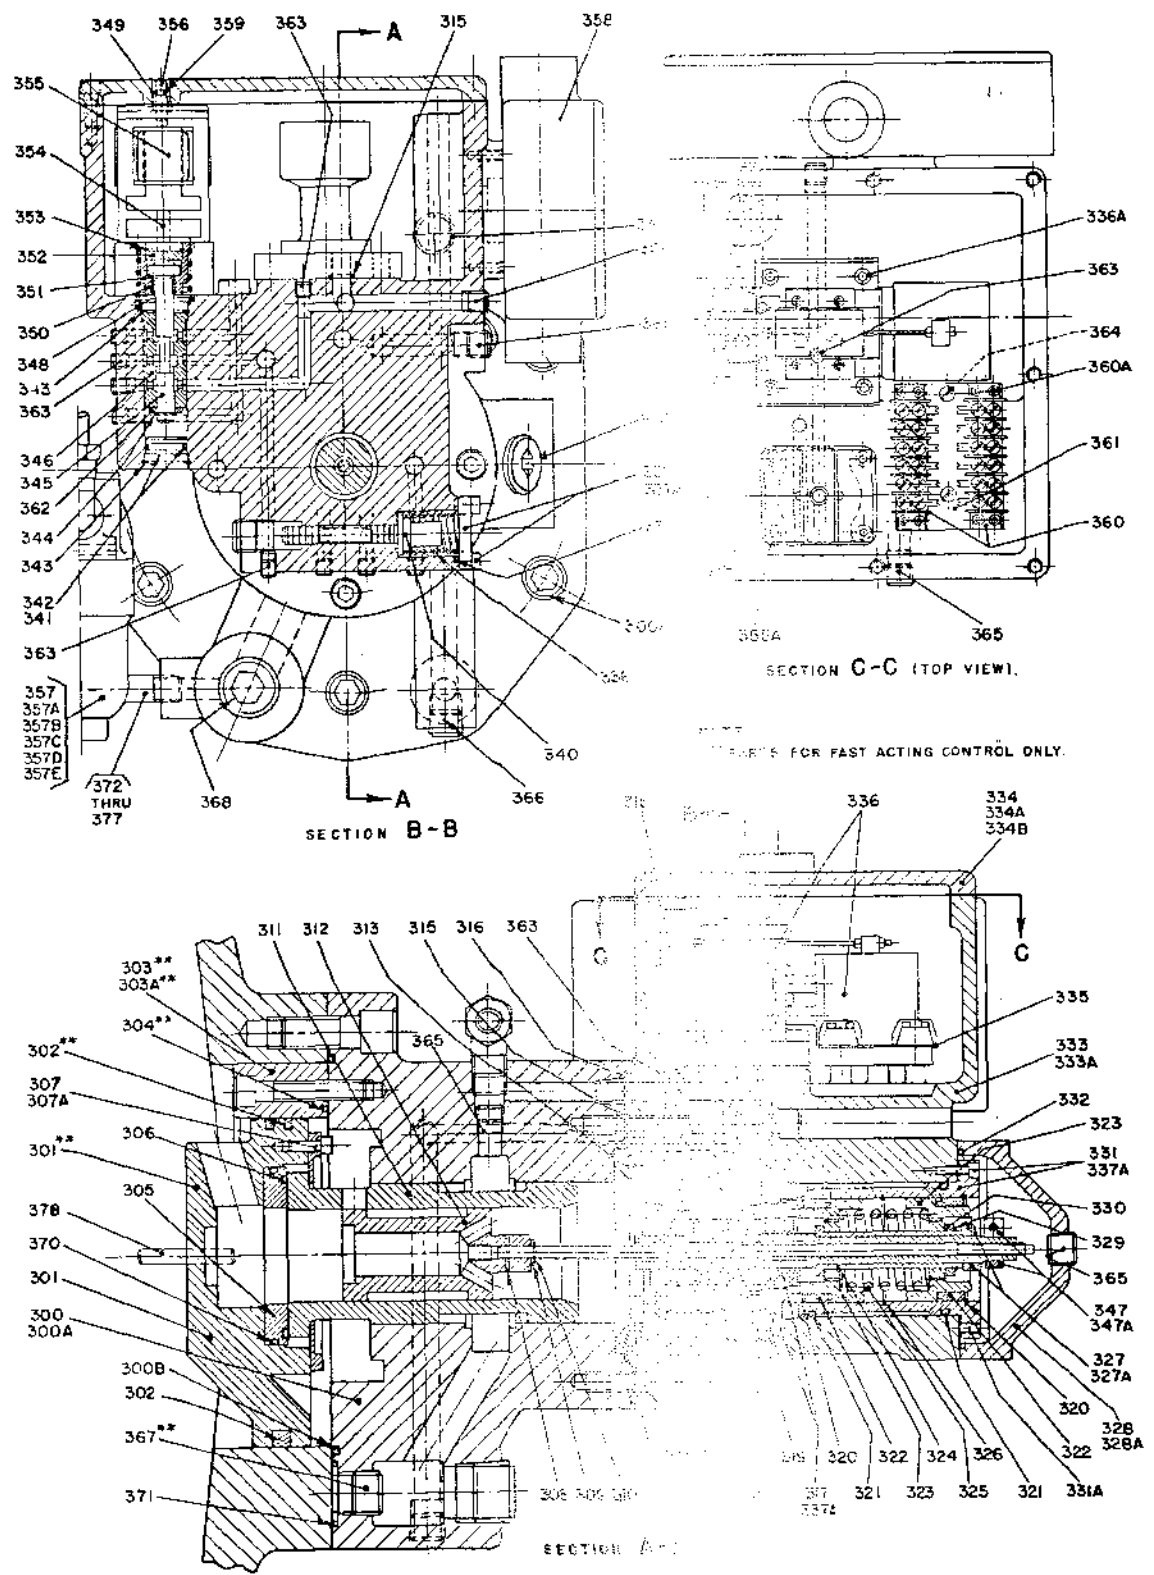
Type "DV" Pumps (Sizes 60-100-150)Control Ports (Drawing No. 947741-A, sh.#2)
